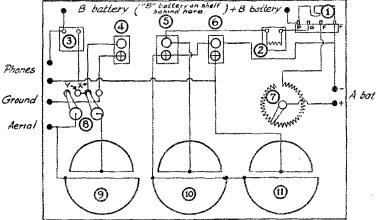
1-Tube socket, 2- Grid condenser and leak, 3 Telephone condenser 4-Primary coil mounting, 5-Secondary coil mounting, 6-Plate coil mounting 7-Rheastot 8 Series parallel switches 9-Primary (and in Sec Cond, Il Plate Cond
